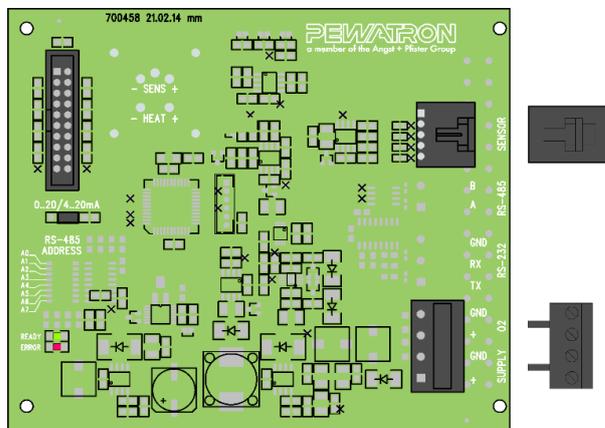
PCB side with plug cable connector; FCX-MCxx-EXT
